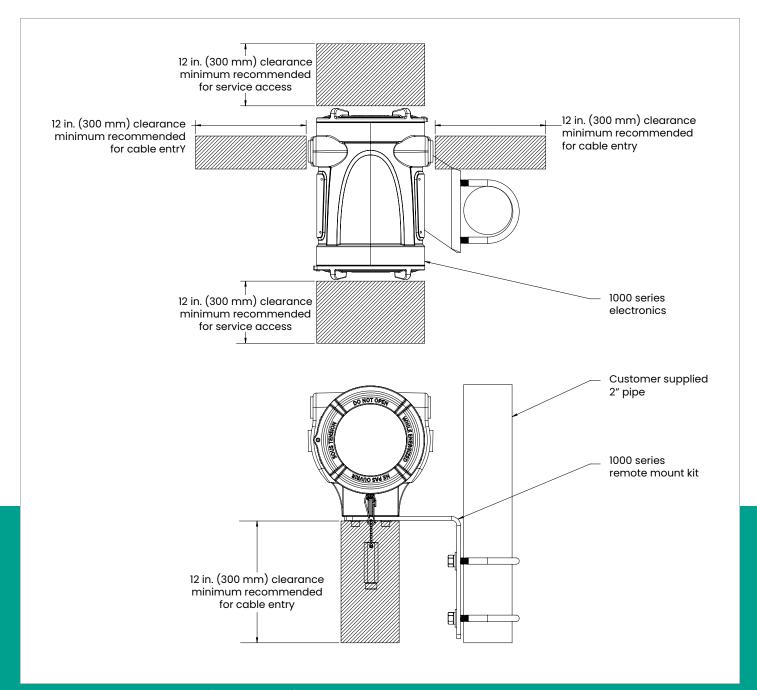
XMT1000 Enclosure clearances (ref. dwg. 712-2164)
